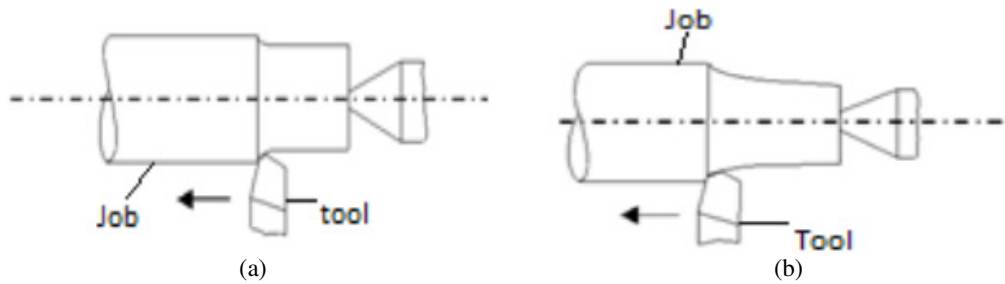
(a) Turning on mini wood lathe (b) Taper turning on mini wood lathe
